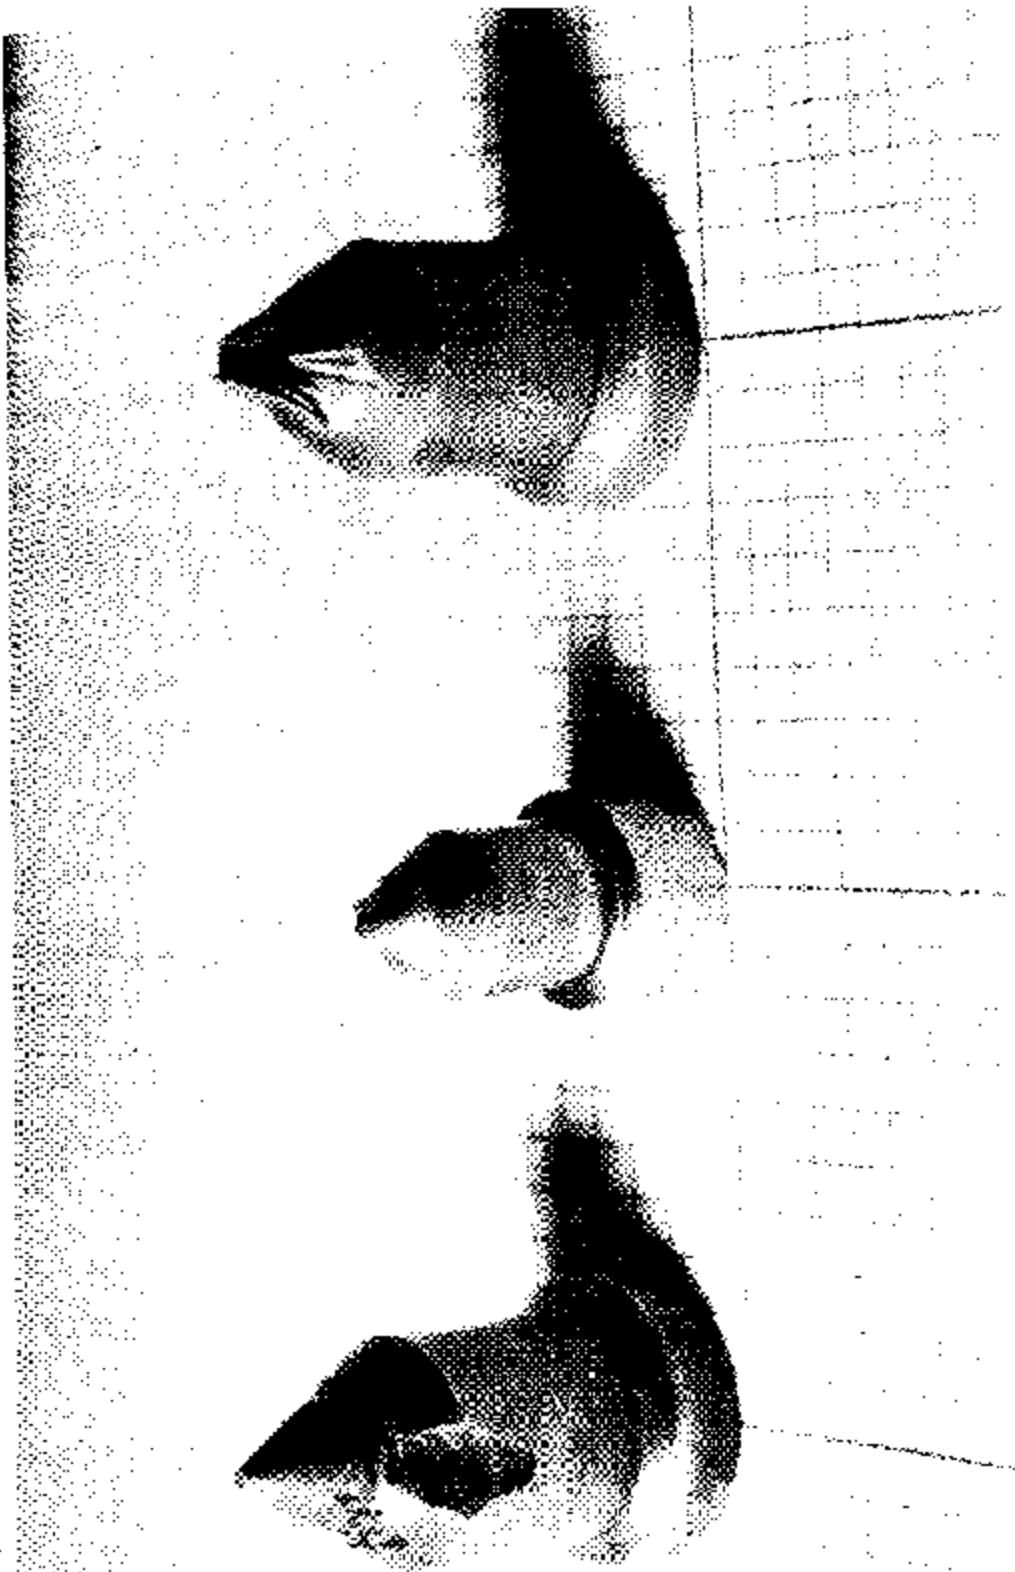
Cemented tungsten carbide valve tips showing wear during use. Left: Tip from mild throttling service, showing erosion at shut-off position. A chip also spalled off owing to mechanical shock. Center: Eroded tip from severe throttling control valve on heavy-oil let-down containing coal ash after 24 hours. Right: Eroded tip from hand-operated severe throttling valve on heavy-oil let-down to flash distillation after 16 hours.
